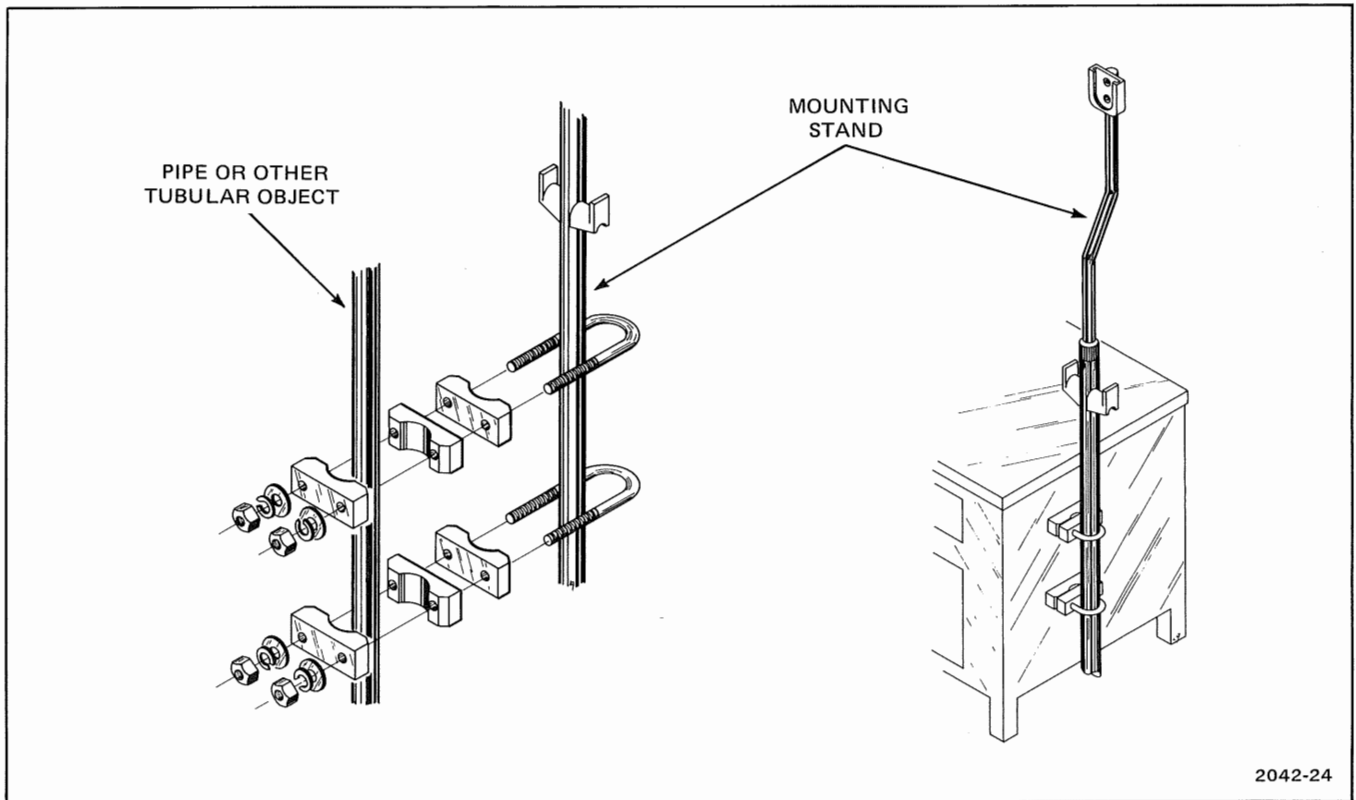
Installing mounting stand to tubular object (pipe) or cabinet side.
